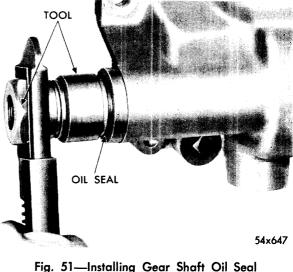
Installing Gear Shatt Oil Seal (Tool C-3350)
